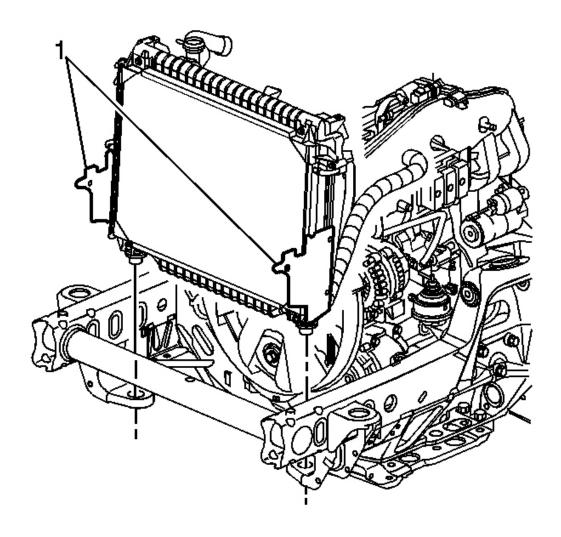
View Of Condenser Courtesy of GENERAL MOTORS CORP.
